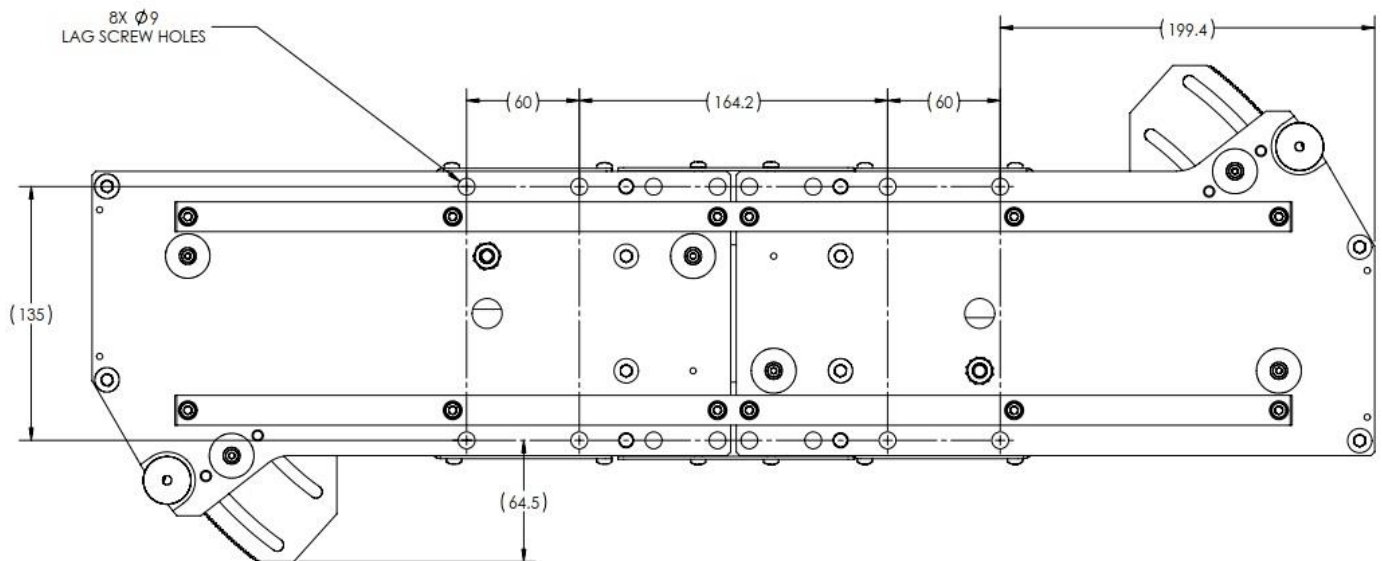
Double Ended MegaSpense Motor/Base Module Mounting Hole Locations
